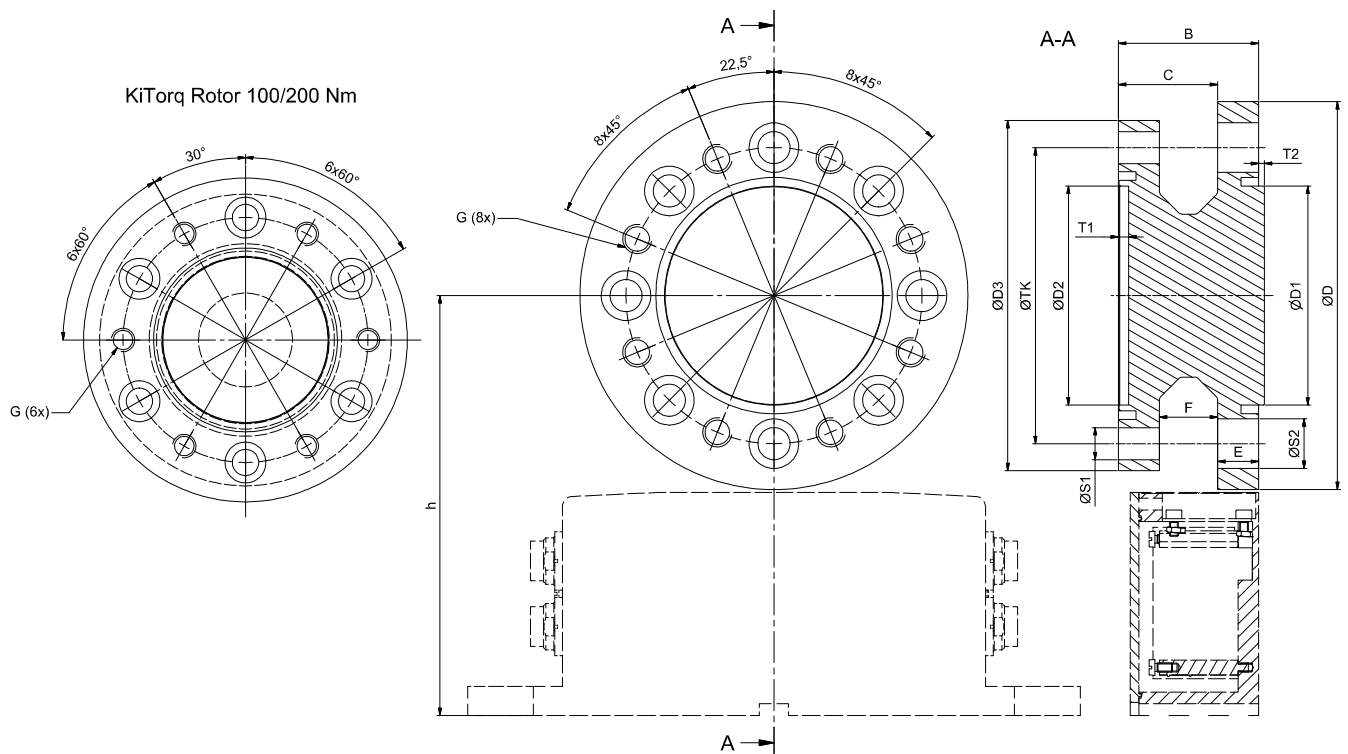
Dimensional drawing of Type 4550A... KiTorq Rotor torque measuring unit
